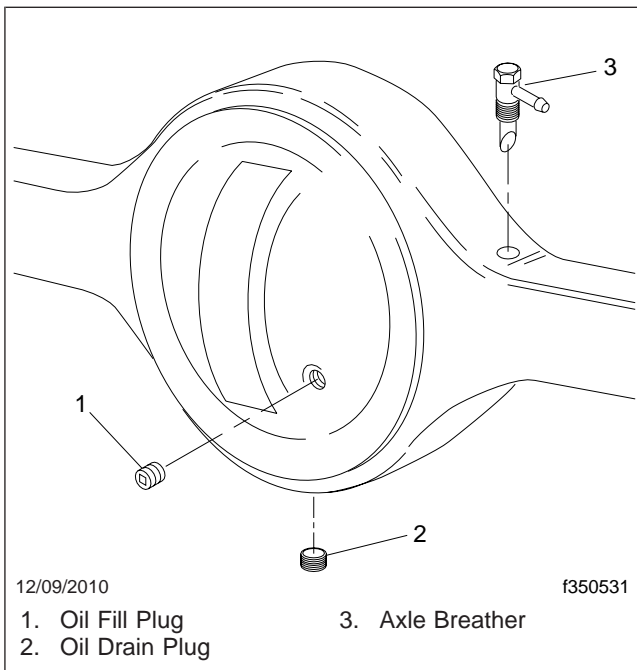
, Fill Hole Plug Location, Dana Spicer Axles
